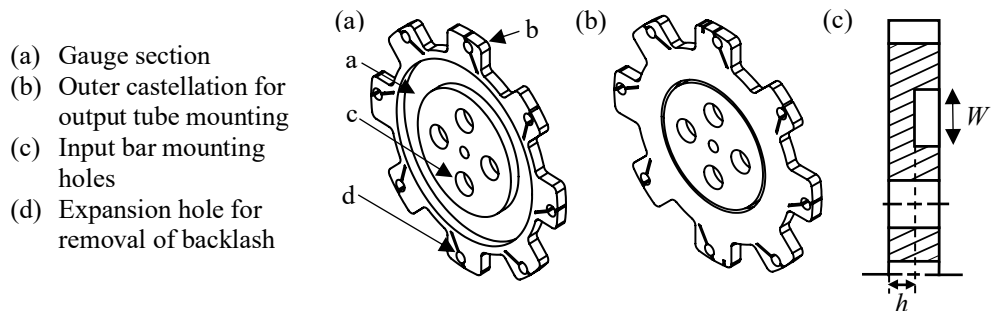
In-plane torsional specimen: (a) Obverse face of wide gauge section with key features labelled, (b) Obverse face of narrow gauge section, and (c) Top half of section view with gauge section dimensions labelled.
